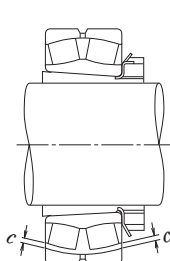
Clearance Measurement of Spherical Roller Bearing
